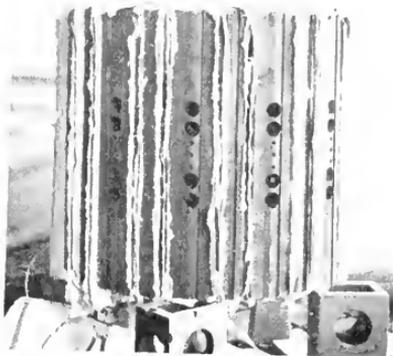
Rotor Spider Wound to be Heated Electrically by Induction. The winding method employed is similar to that in Fig. 2 except the cable is laid in dovetail slots
